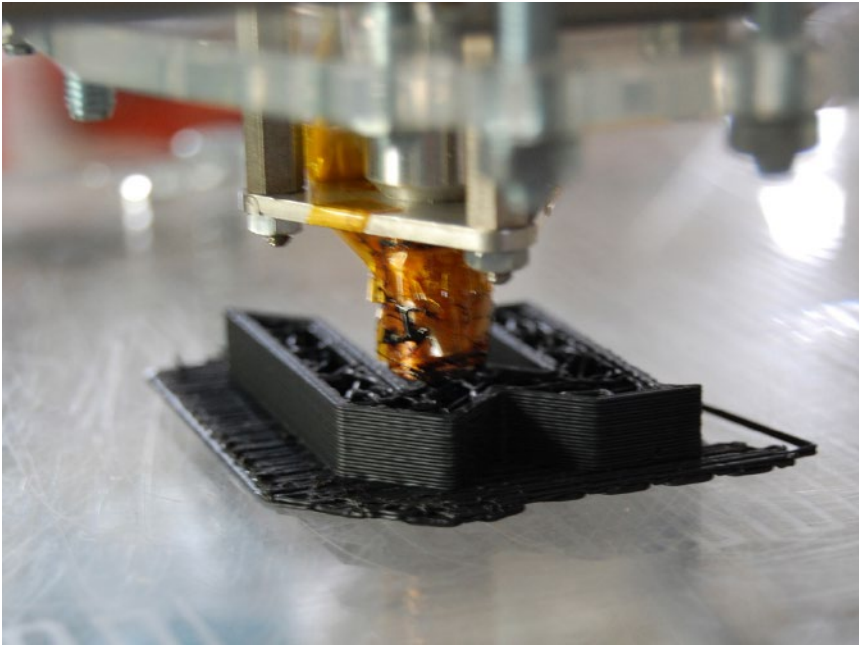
Encoded Matter: Pushing Machine Limits
